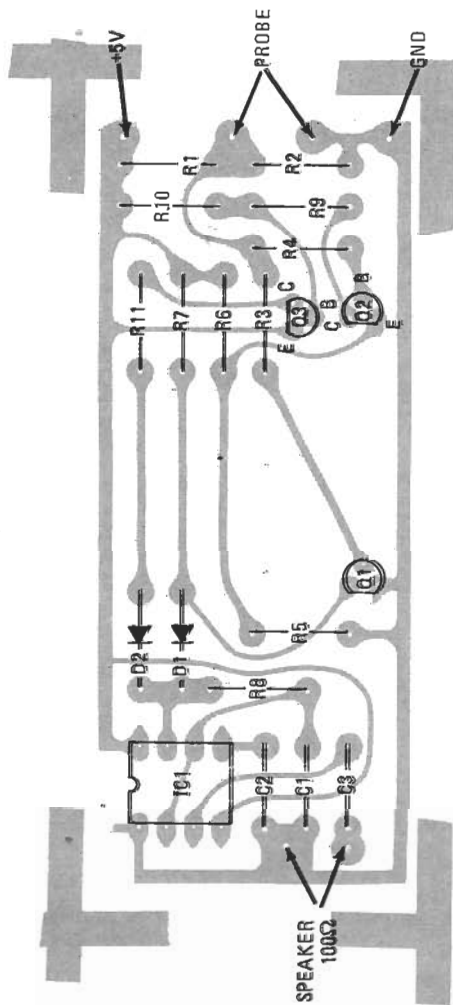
PRINTED-CIRCUIT foil pattern. The board measures $6 \times 2\frac{3}{8}$ in. (15.2×6.0 cm.)
